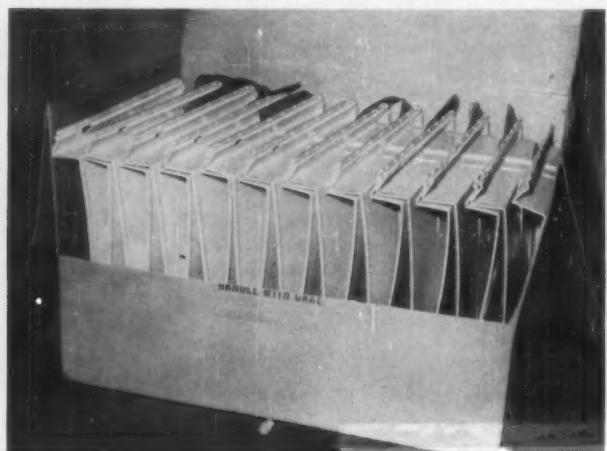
By stacking molded styrene refrigerator door liners back-to-back, and front-to-front, only 13 units could be accommodated in corrugated shipping carton
